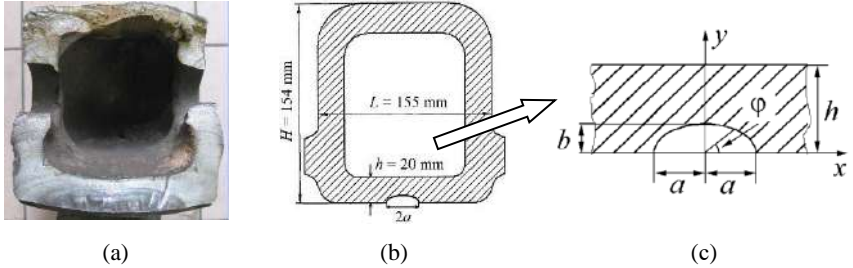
Cracked side frame fatigue fracture at the box opening inner corner cross section (a) and model representation of this cross section with a semielliptical crack (b, c).
